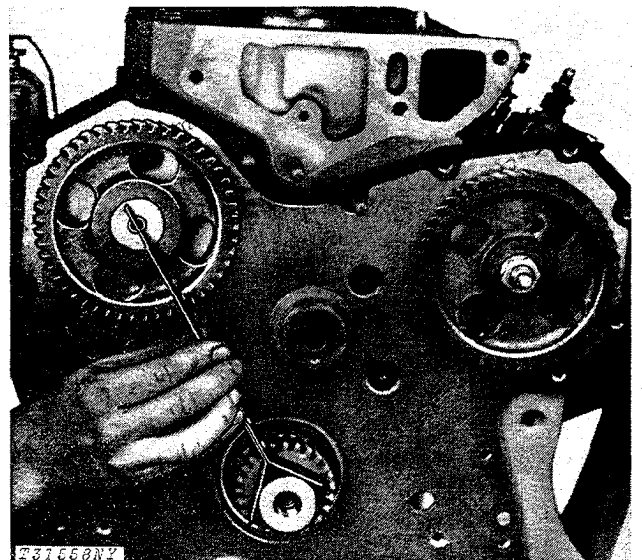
Timing the Camshaft Gear with JD-254 Tool
